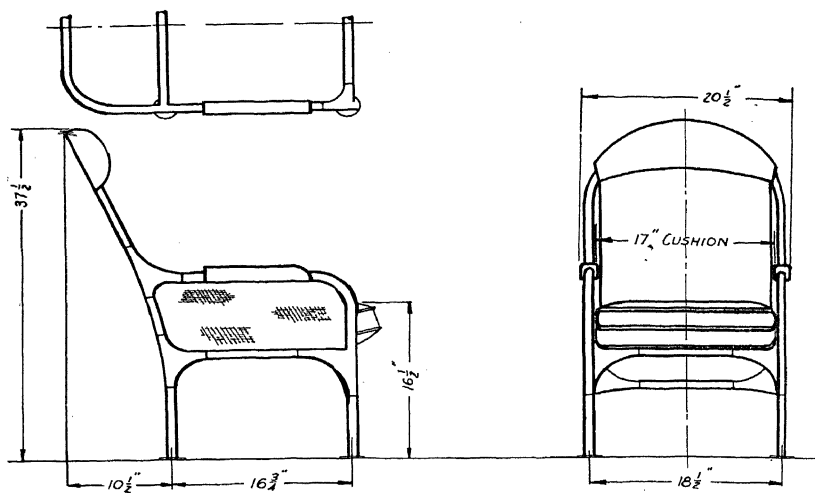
SUGGESTED DIMENSIONS FOR
